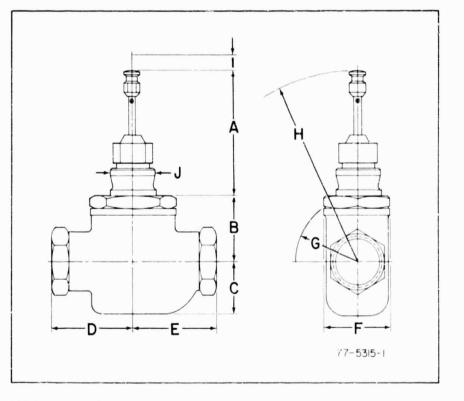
V5011A & C SCREWED, DIRECT ACTING BODY DIMENSIONS (REFER TO TABLES 5 AND 6)
